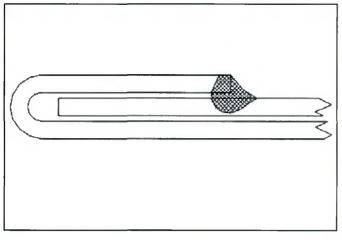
Cross section of fillet weld in lap joint configuration.
